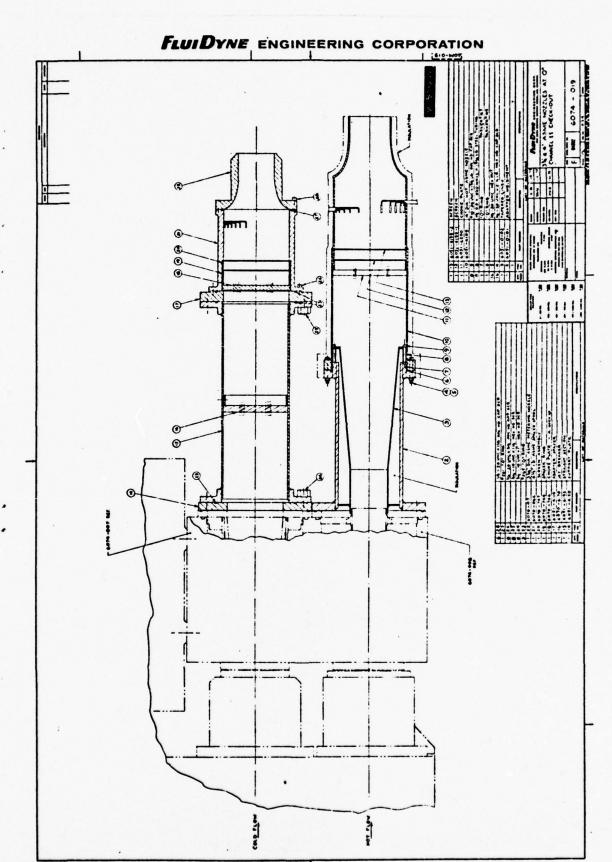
ASME NOZZLE TEST ASSEMBLY DRAWING
